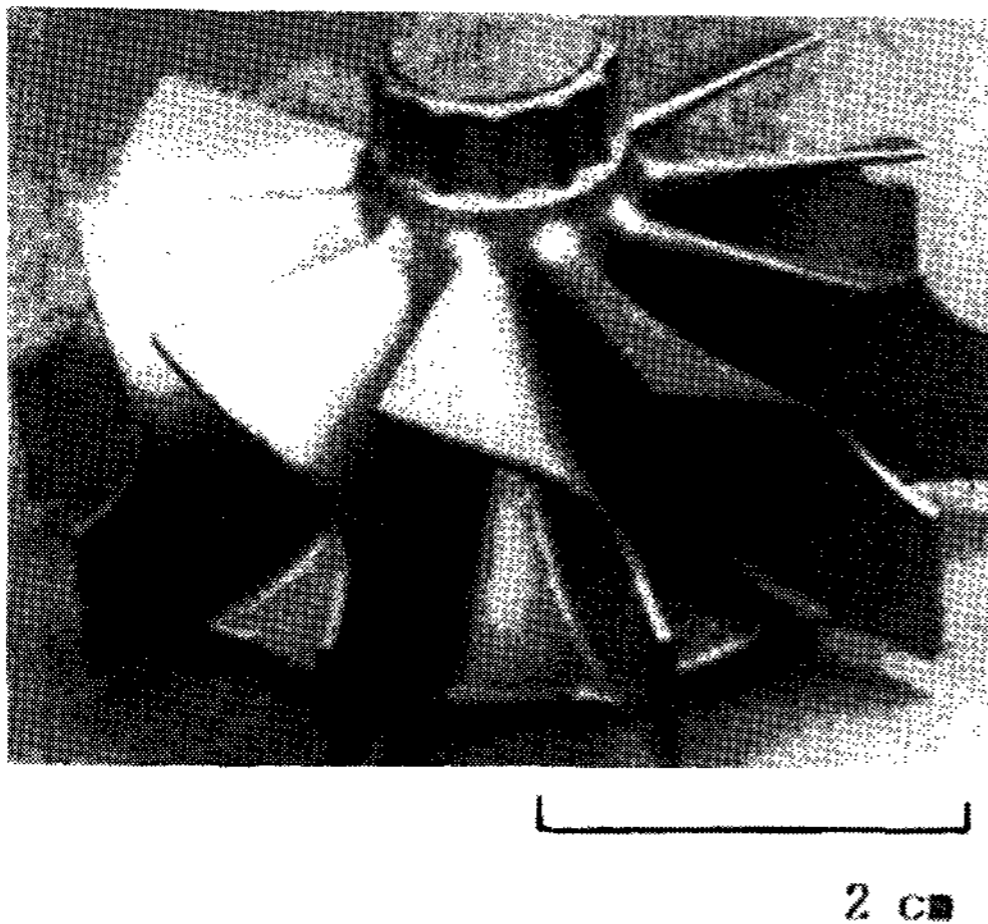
A TiAl turbine wheel cast using the conter-gravity, low-pressure casting process.⁽¹¹⁾
